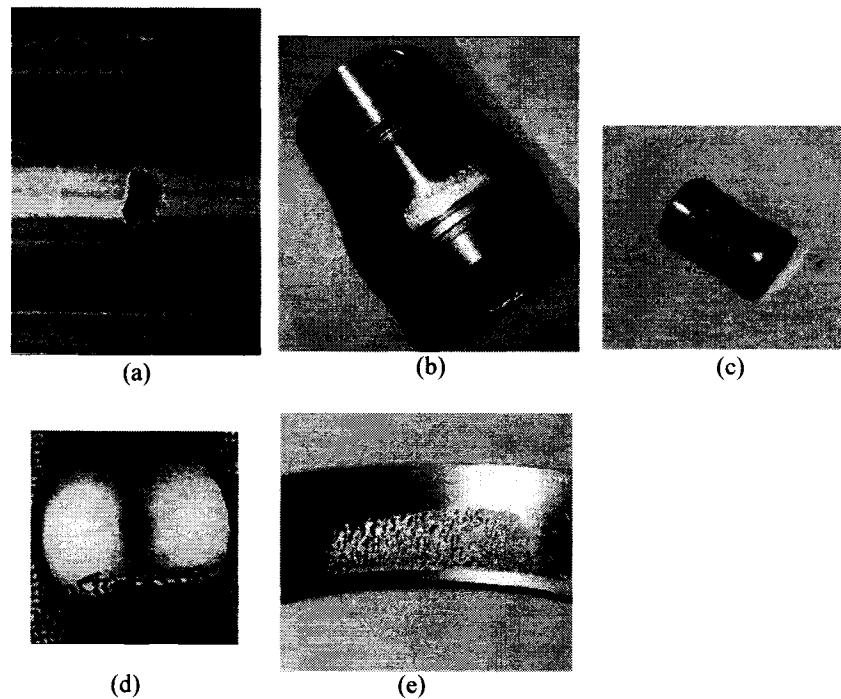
(a), (b) Ball and roller bearing inner race defects (c),(d) roller and ball defects (e) outer race defect (Kotzalas and Harris 2001, Qiu *et al* 2003)
